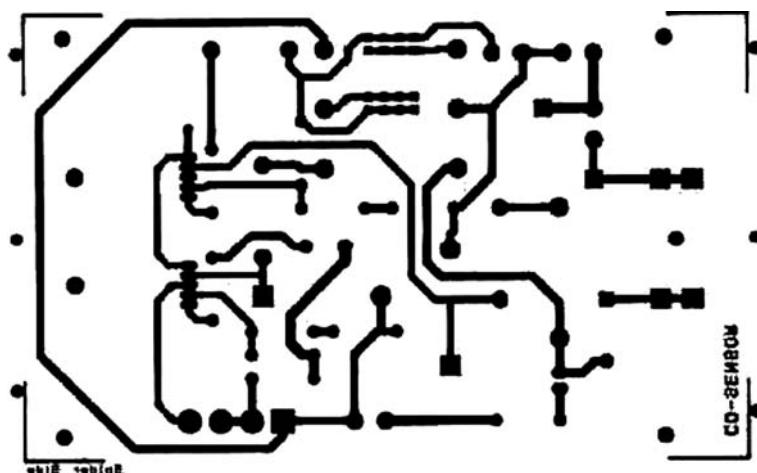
PCB (bottom) layer of power supply part of CO-monitoring device
